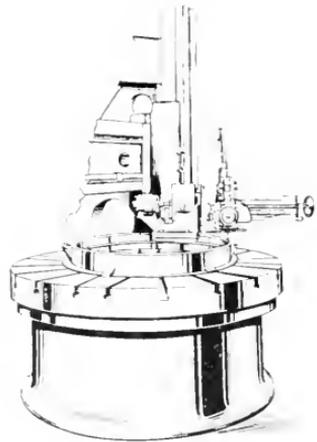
Automatic Welding Head Supported on Boring Mill to Obtain Circular Weld
